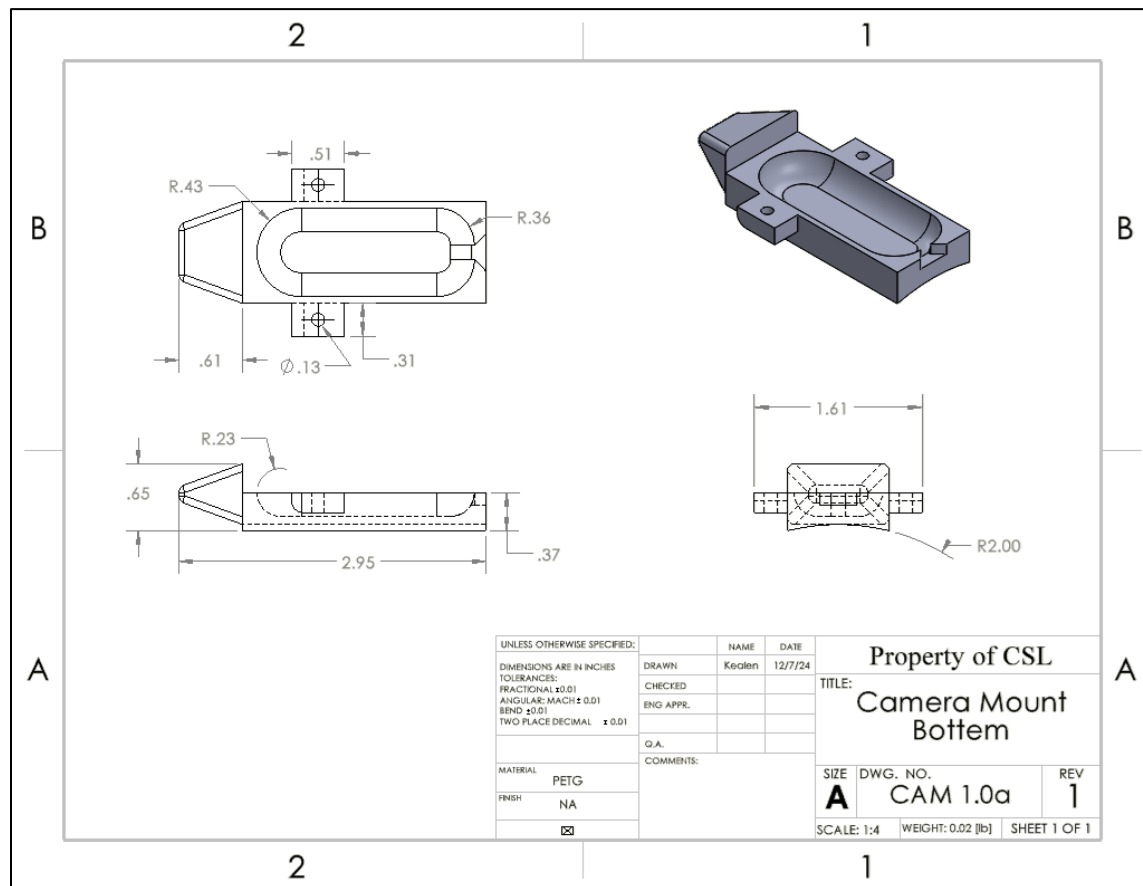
Drawing of the Camera Mount's Lower Portion with critical dimensions.
